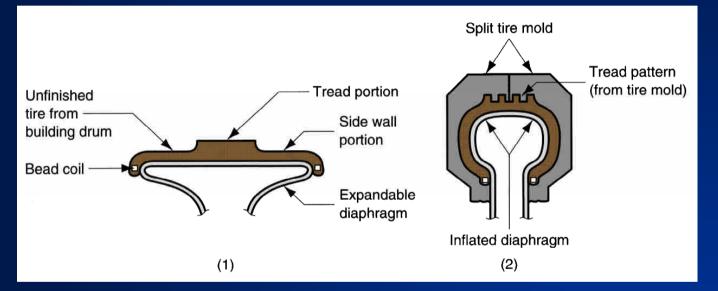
Tire molding: (1) uncured tire is placed over expandable diaphragm; (2) mold is closed and diaphragm is expanded to force uncured rubber against mold cavity, impressing tread pattern into rubber; mold & diaphragm are heated to cure rubber
